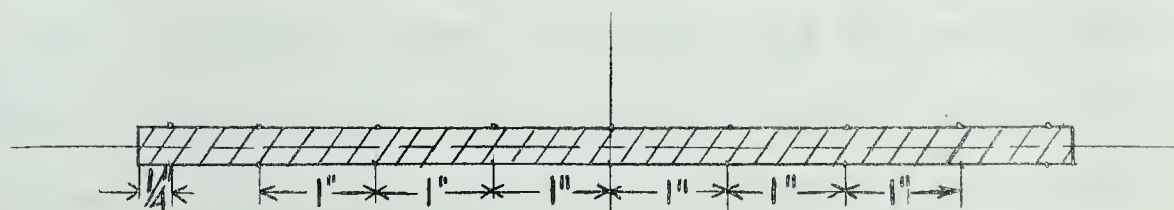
(b) Diametric Section of the Plate, showing the Location of Thermocouples for the Elastically Supported Circular Plate.
